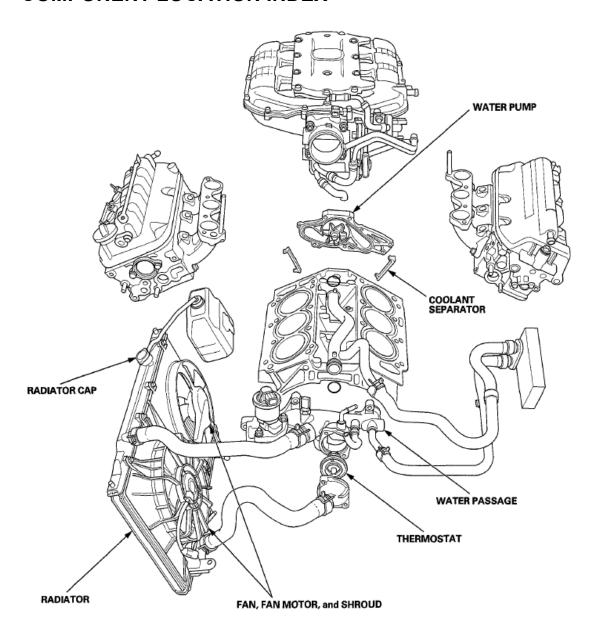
Identifying Cooling System Components Courtesy of AMERICAN HONDA MOTOR CO., INC.
